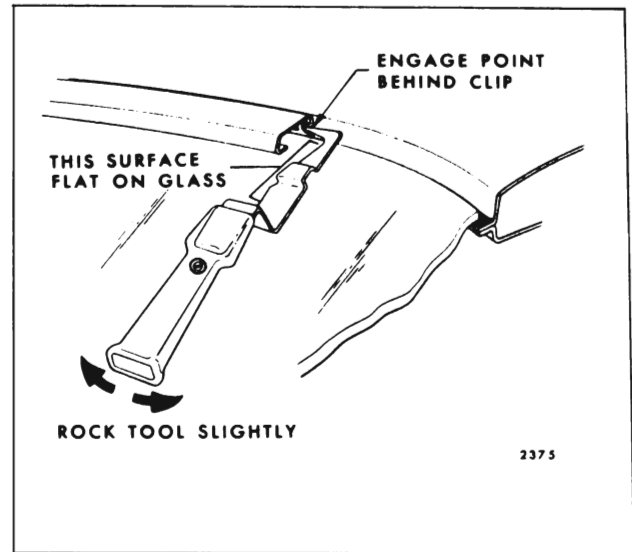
Usage of Reveal Molding Removal Tool (Handle J-21544-1 and Reveal Molding Remover J-21549-5 Shown. Others Similar)
